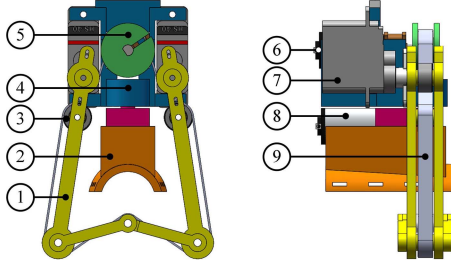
General assembly of proposed device. (1) Linkage of five-bar mechanism, (2) Finger cover, (3) Bearing, (4) Motor base, (5) Belt reel, (6) DC motor #1, (7) Servo motor, (8) DC motor #2, (9) Belt.
